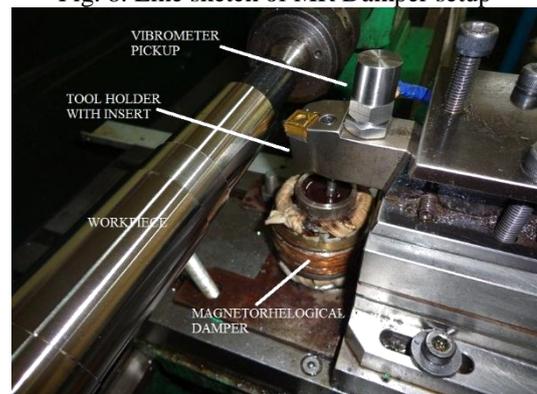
MR Damper and vibrometer pickup attached to tool holder
